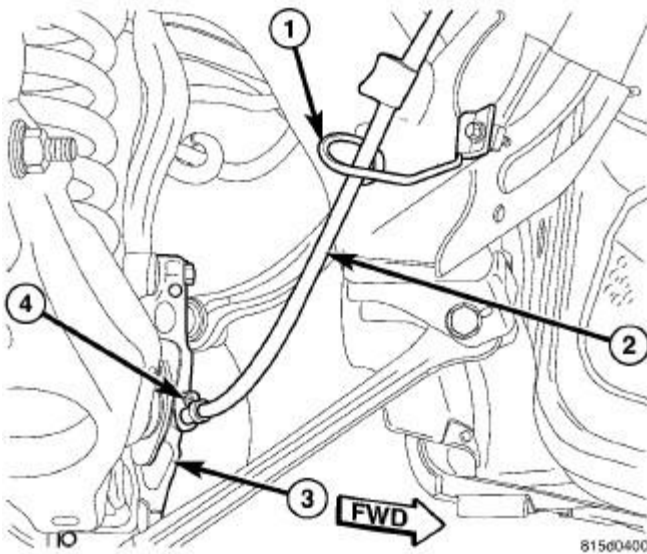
REAR CABLE ROUTING TO KNUCKLE
